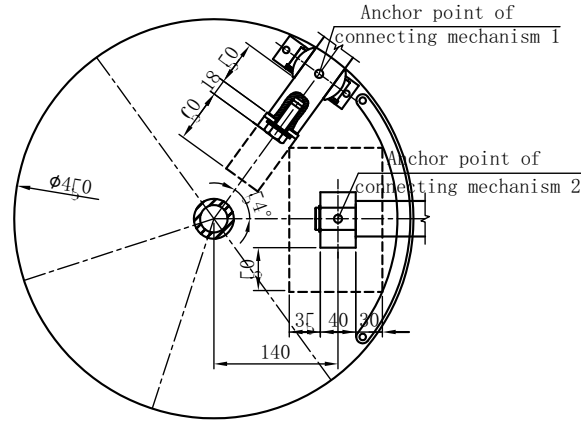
Adaptive connecting mechanisms 1 and 2 in an adjacent arrangement.
